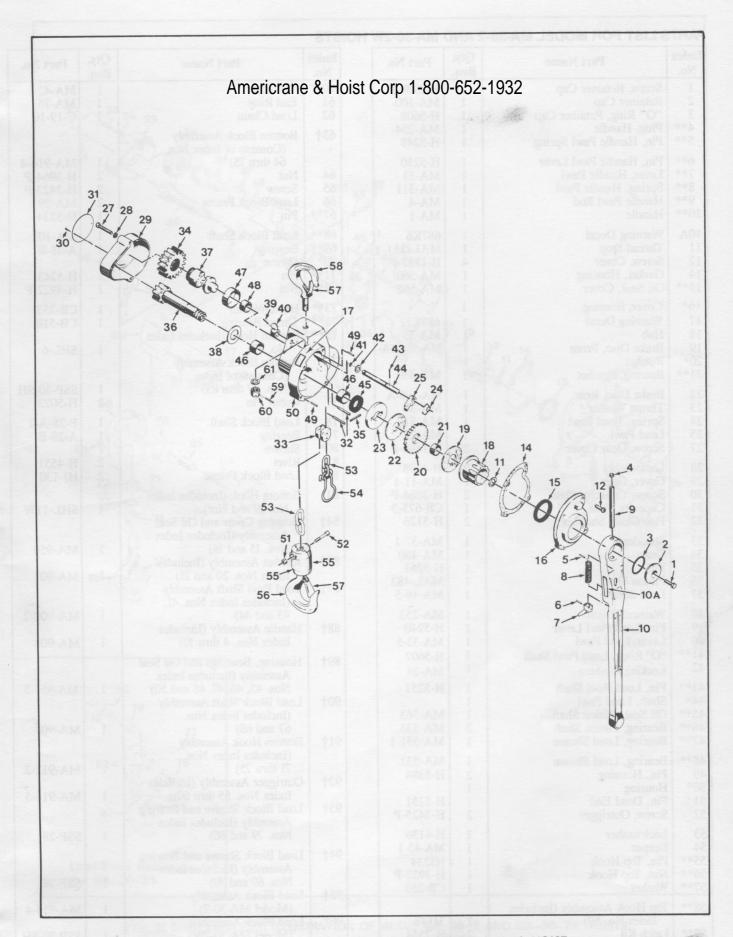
EXPLODED ILLUSTRATION OF MODEL MA-30 HOIST
